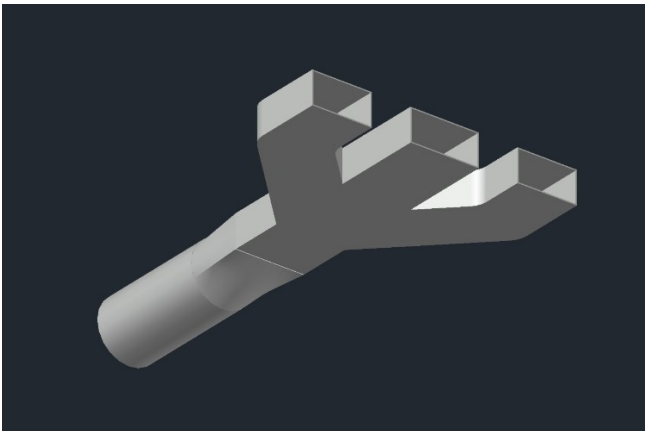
Base manifold design 3D geometry modeled in AutoCAD
